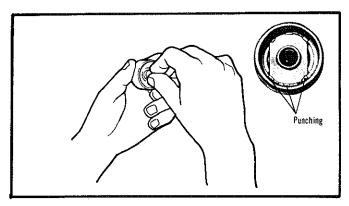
Checking piston-to-automatic adjuster spindle clearance
